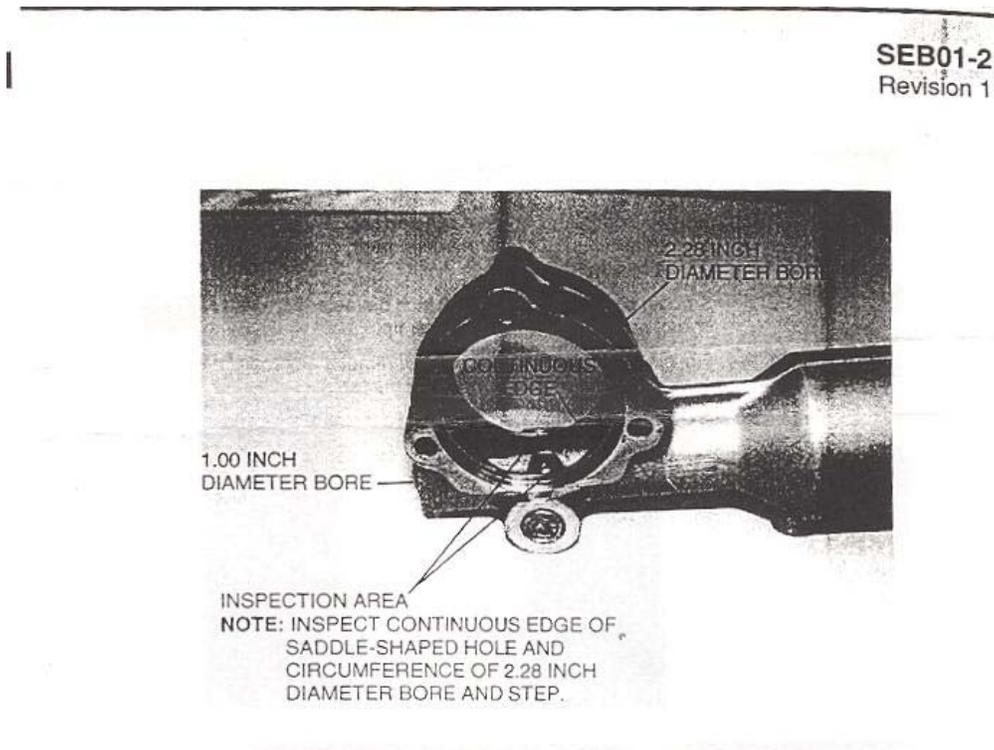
MAIN LANDING GEAR ACTUATOR INSPECTION
